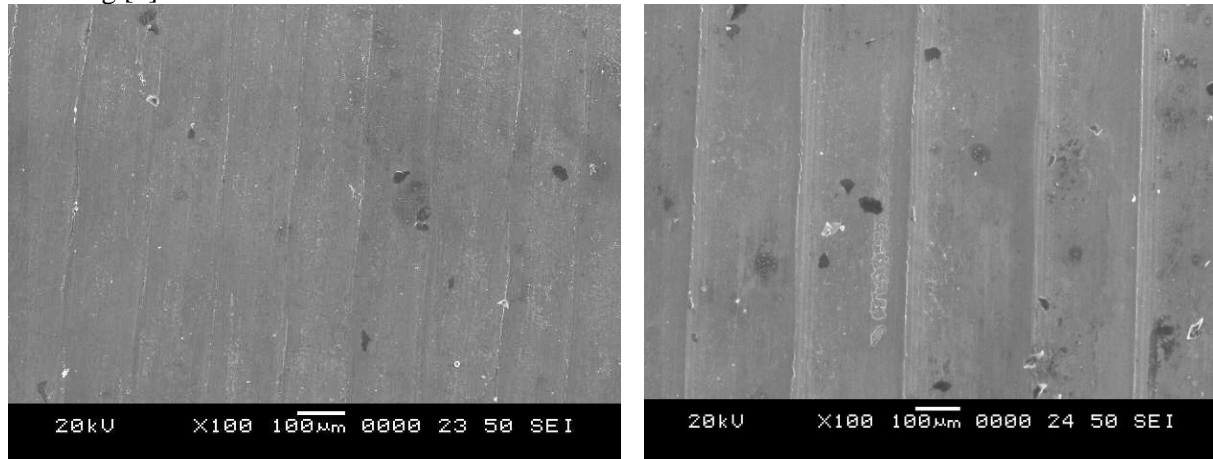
SEM images of the Machined surface at(a) Spindle speed = 775 rpm, feed rate = 0.143 mm/rev, Depth of cut = 1 mm (b) Spindle speed = 775 rpm, feed rate = 0.238 mm/rev, Depth of cut = 0.6 mm
